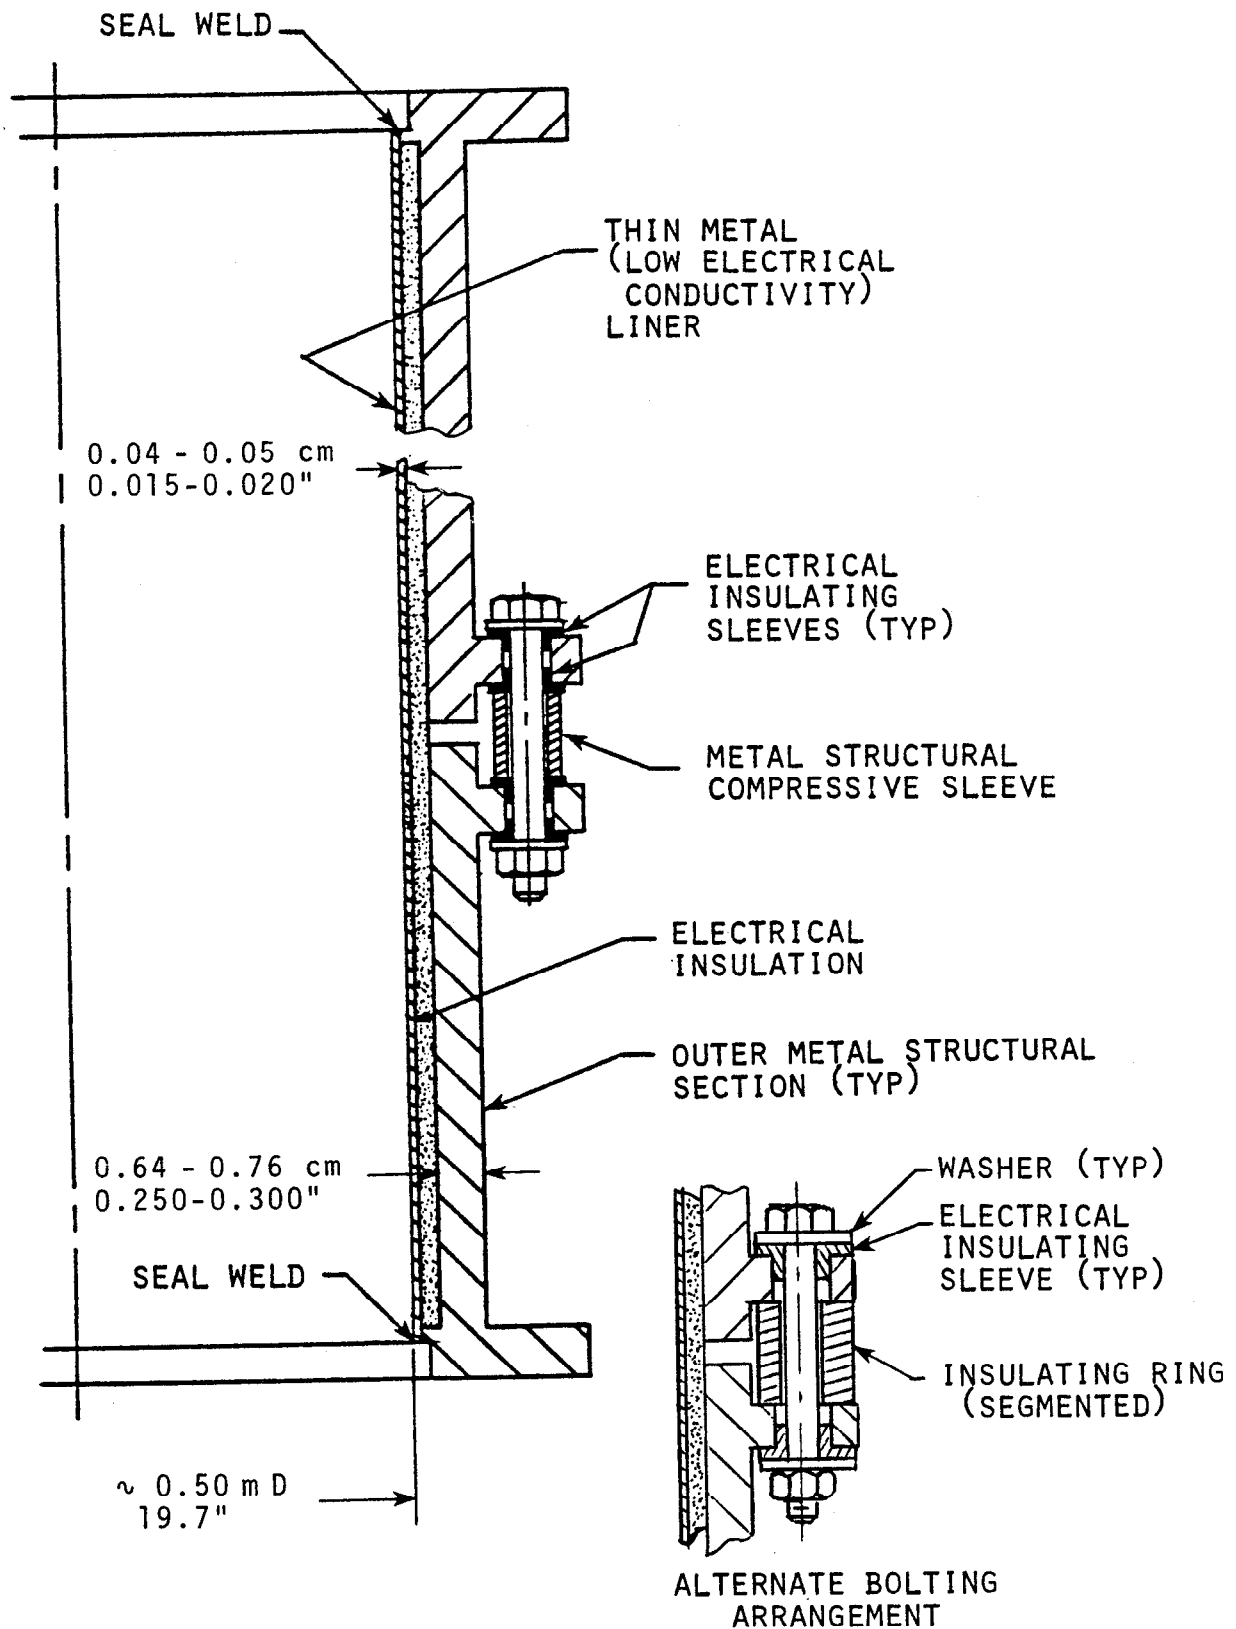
Concept for electrically insulated pipe section for the liquid metal cooled TMHR blanket.
